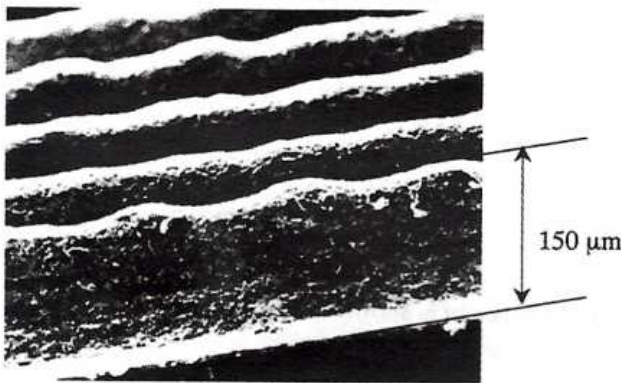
Photograph of the top shape of the printing rib before polishing.
